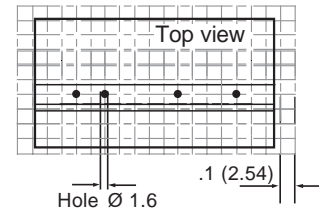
LS relays with HS1; dimensions in inches (mm)
